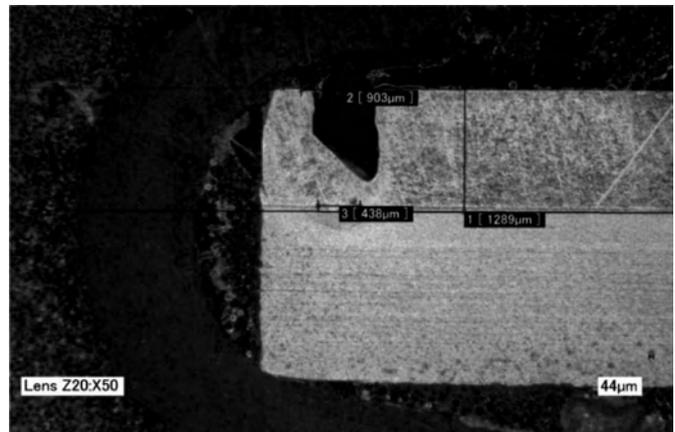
Picture of weld without gap, with 3 mm defocus.
